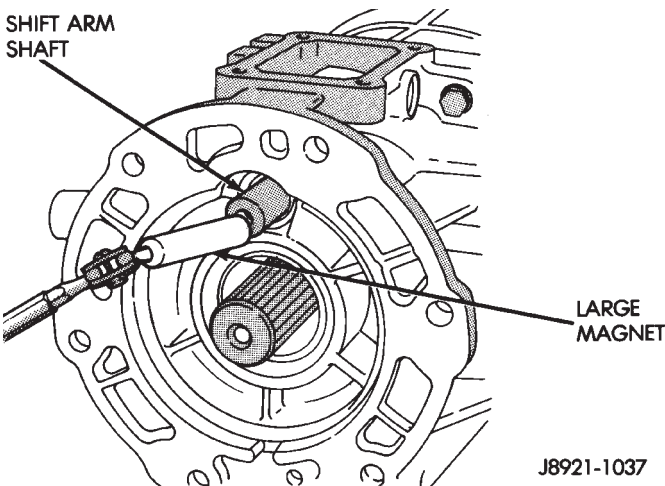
Removing/Installing Shift Lever Shaft Plug
